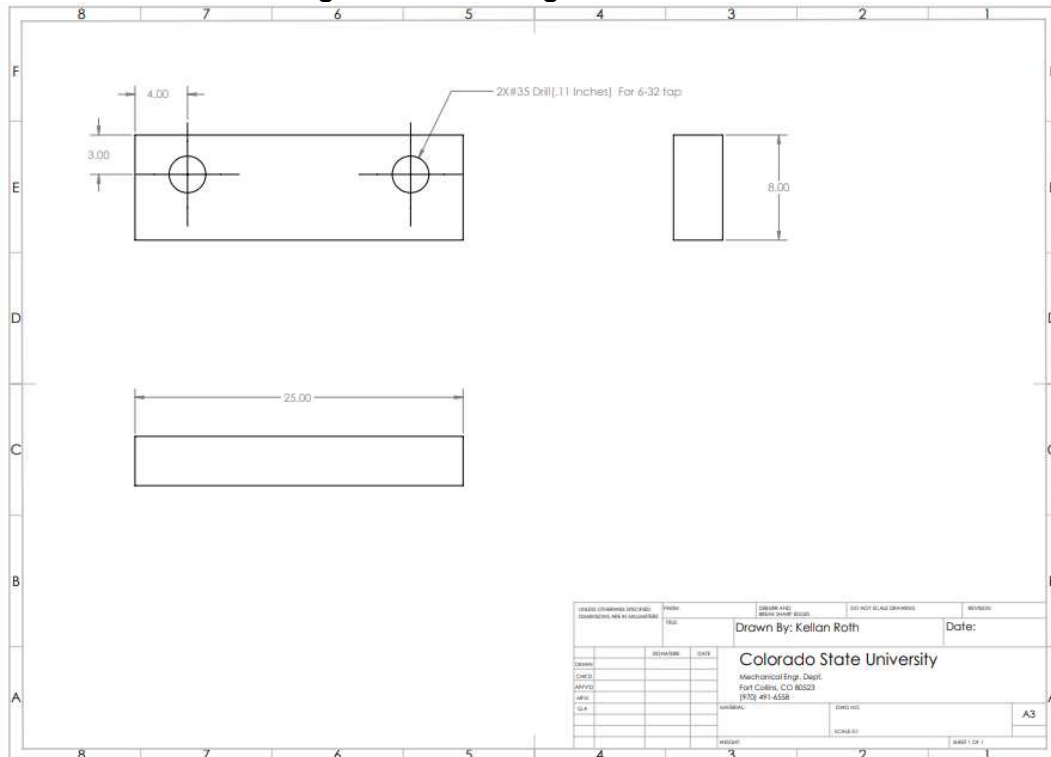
Drawing of mounting system (Part F) clamping mechanism
